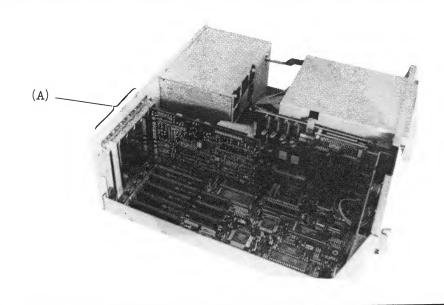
OPTION CARD REMOVAL/REPLACEMENT
